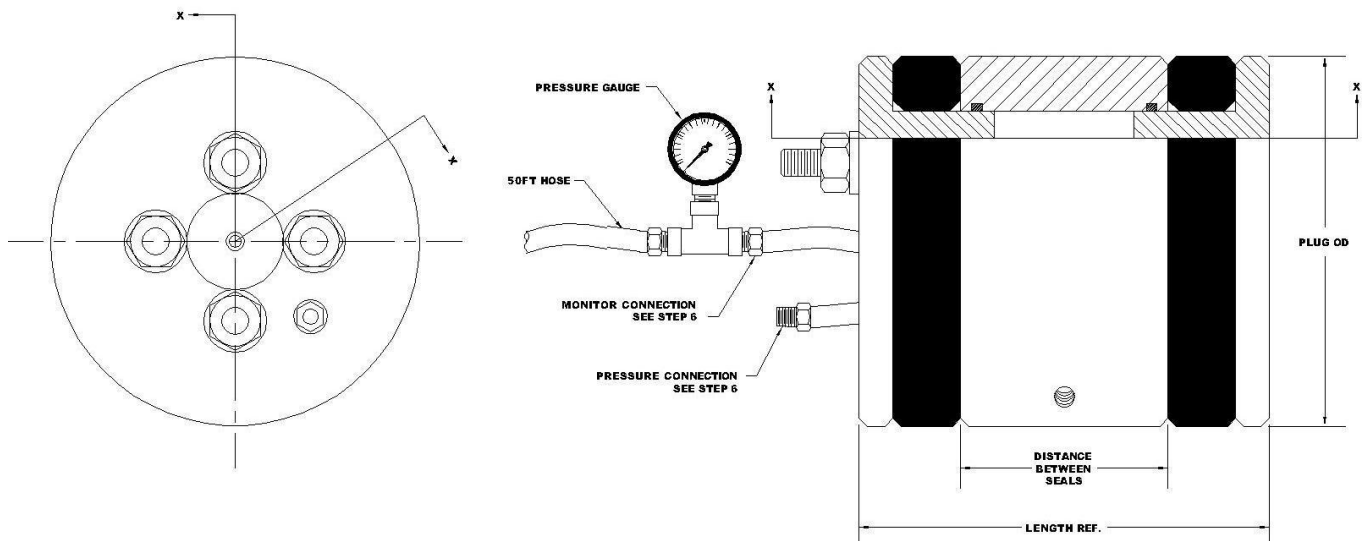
Double Block & Bleed 4" to 24" Plug Sizes
